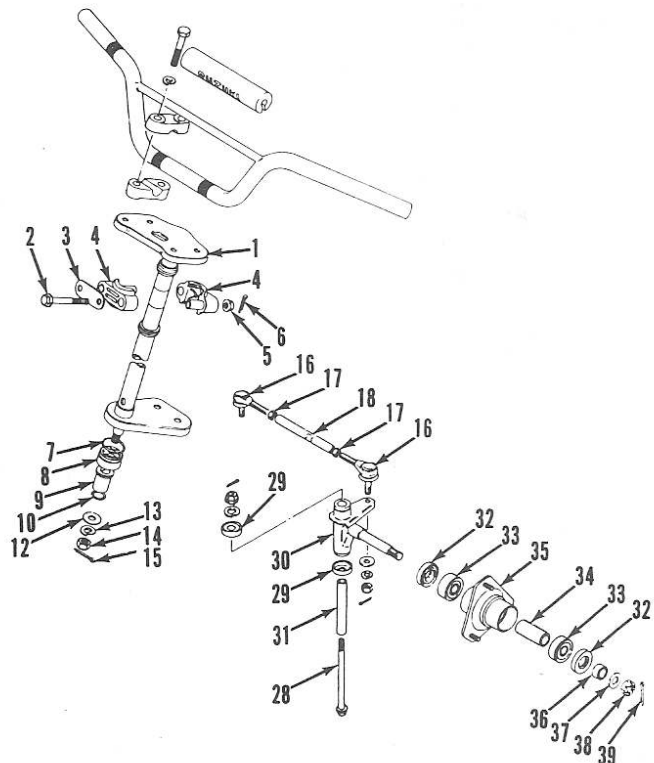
Exploded view of steering and front axle assembly used on LT125 models. Refer to Fig. S6-22 for parts identification.
